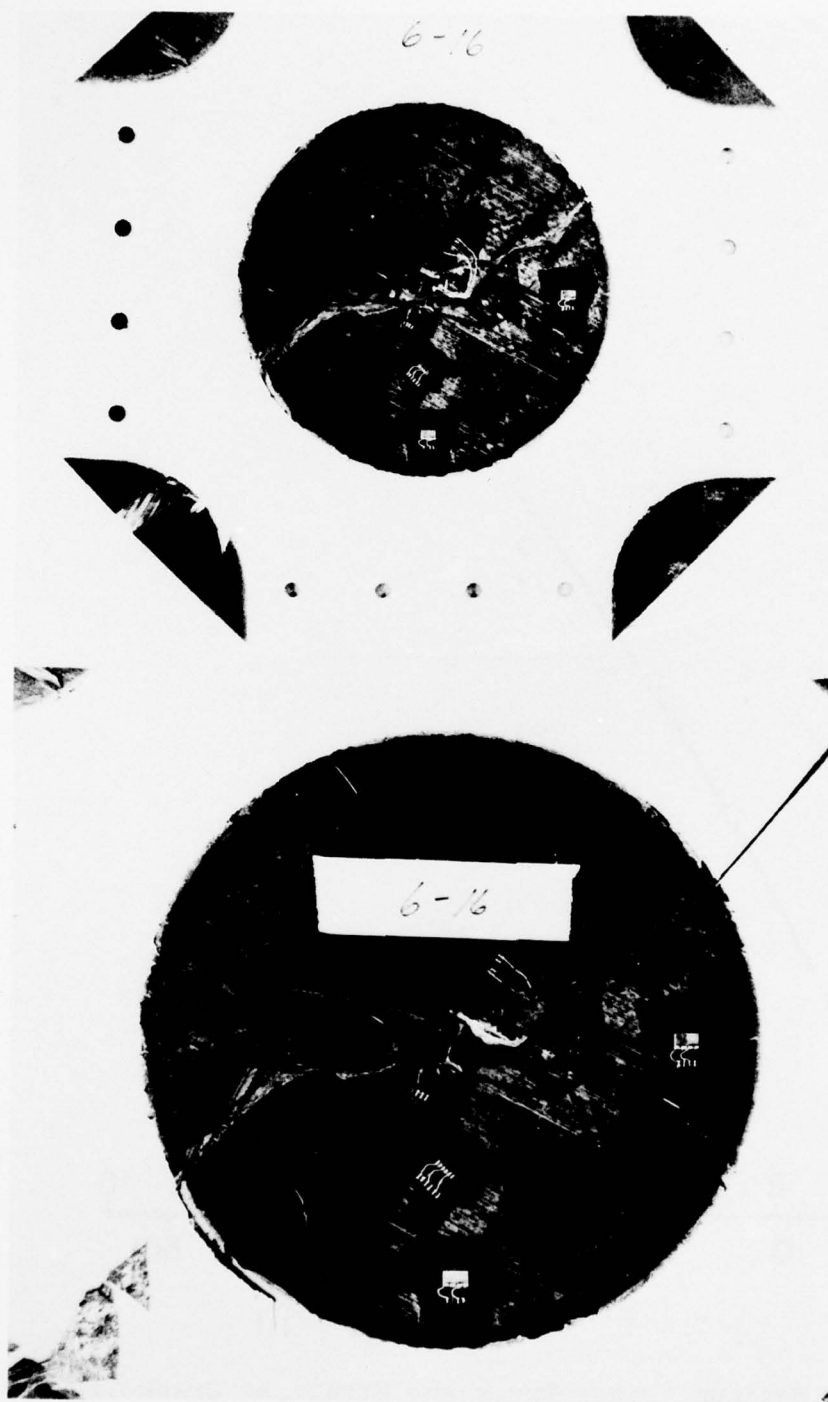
Biaxial Specimen with 1.27 cm (0.50 in.) Long Crack After Failure (Spec. No. 6-16).
